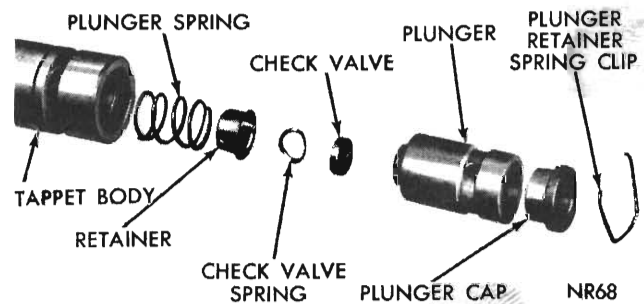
Hydraulic tappet assembly (disassembled view)
